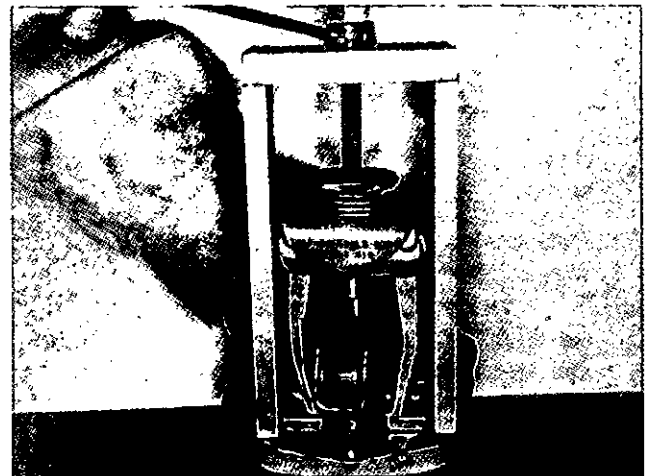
, (F538). Use the ST-709 to pull the governor weight assembly.
